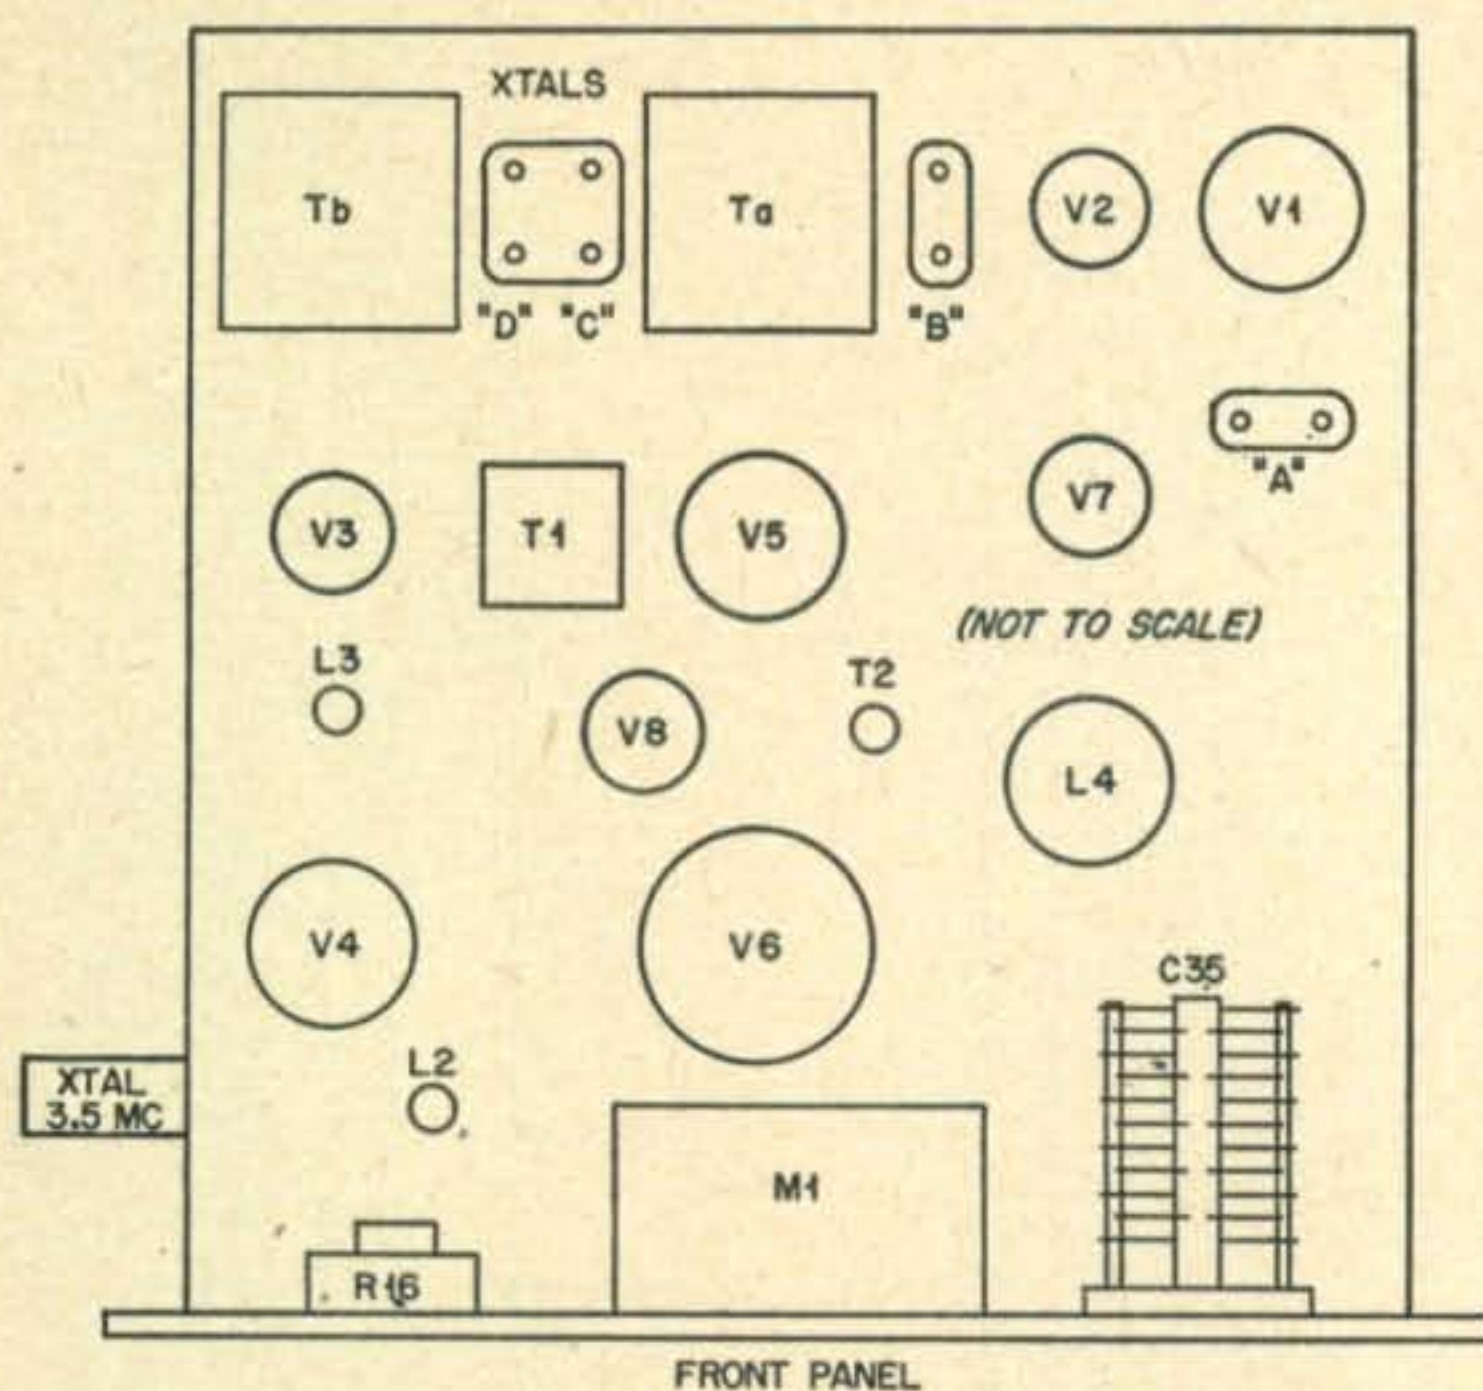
Plan view of chassis top identifying the components shown in the photograph on the facing page.
